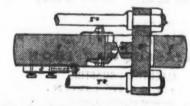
Sectional View, Showing the Side Knife Edges.
